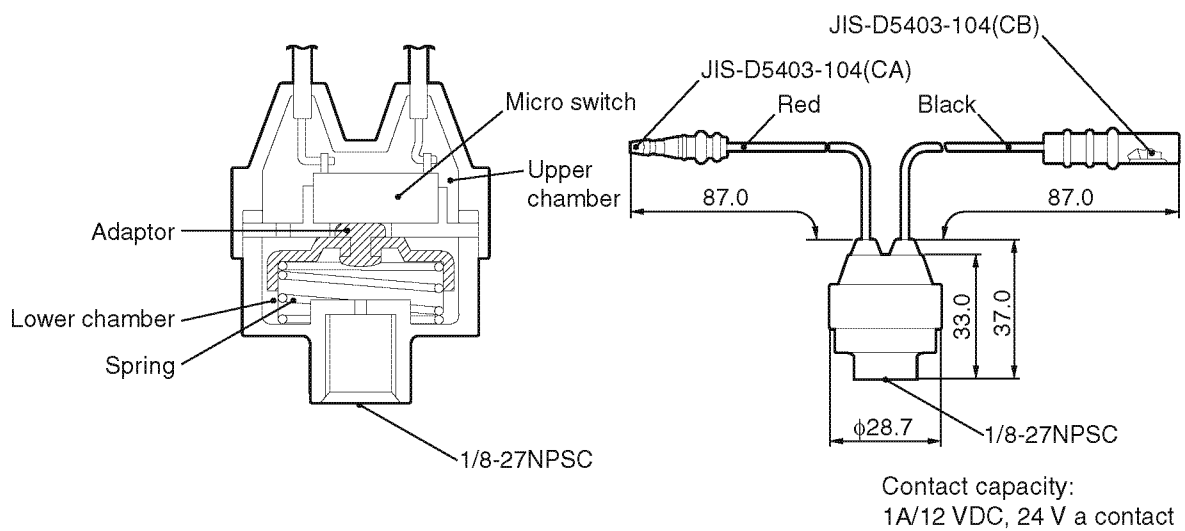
Electric dust Indicator: Part code: 119140-12680
